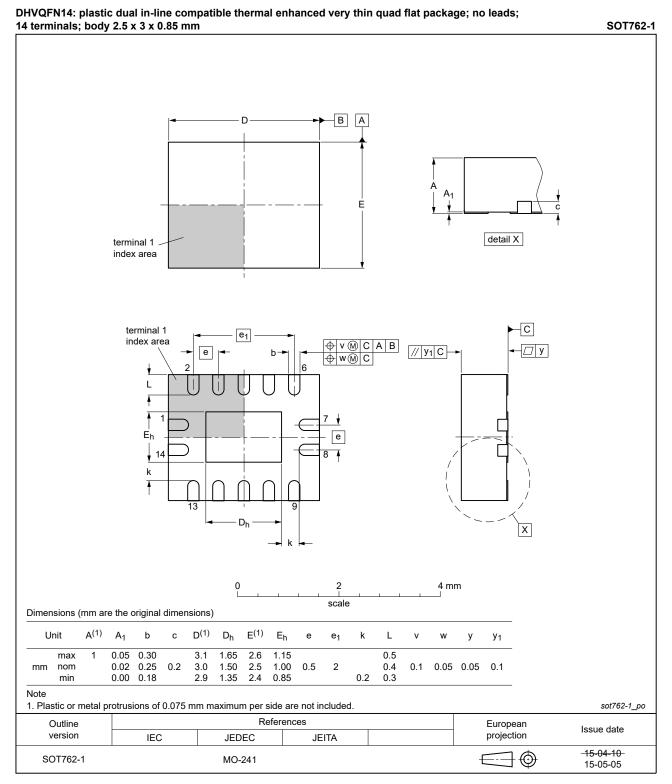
Package outline SOT762-1 (DHVQFN14)
